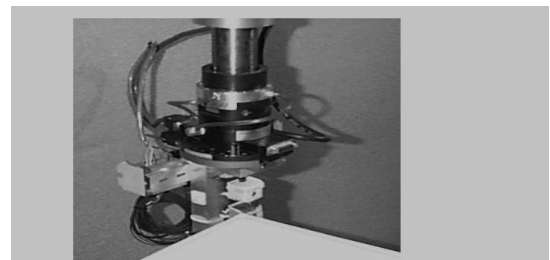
Hot knife setup with graphite blade and untrimmed module [1]
